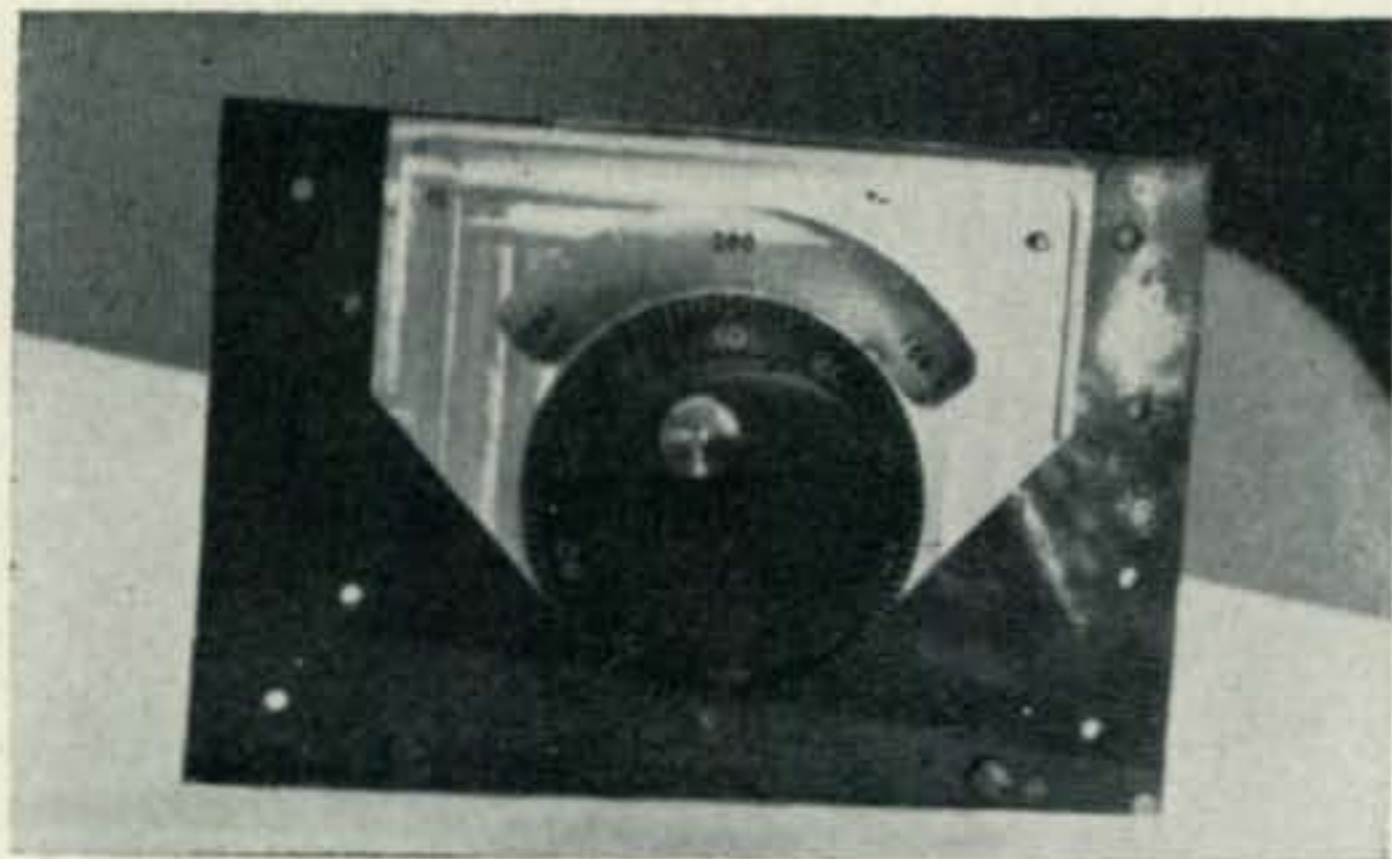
Dial drive assembly made for a home brew slug tuned v.f.o.
